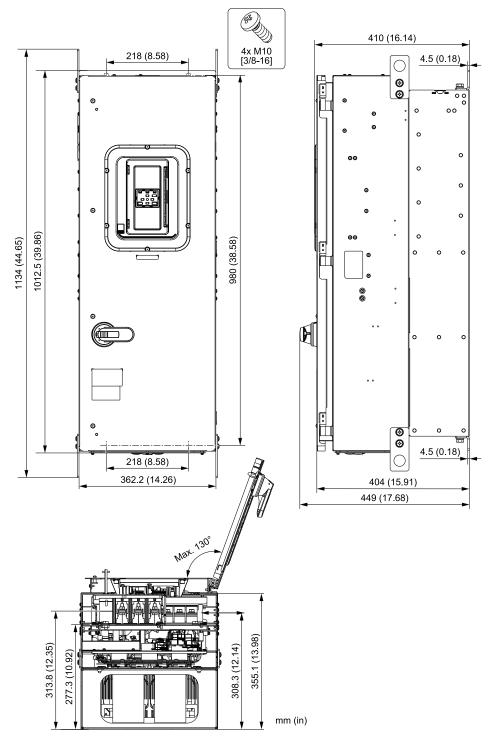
Exterior and Mounting Dimensions Diagram 7
